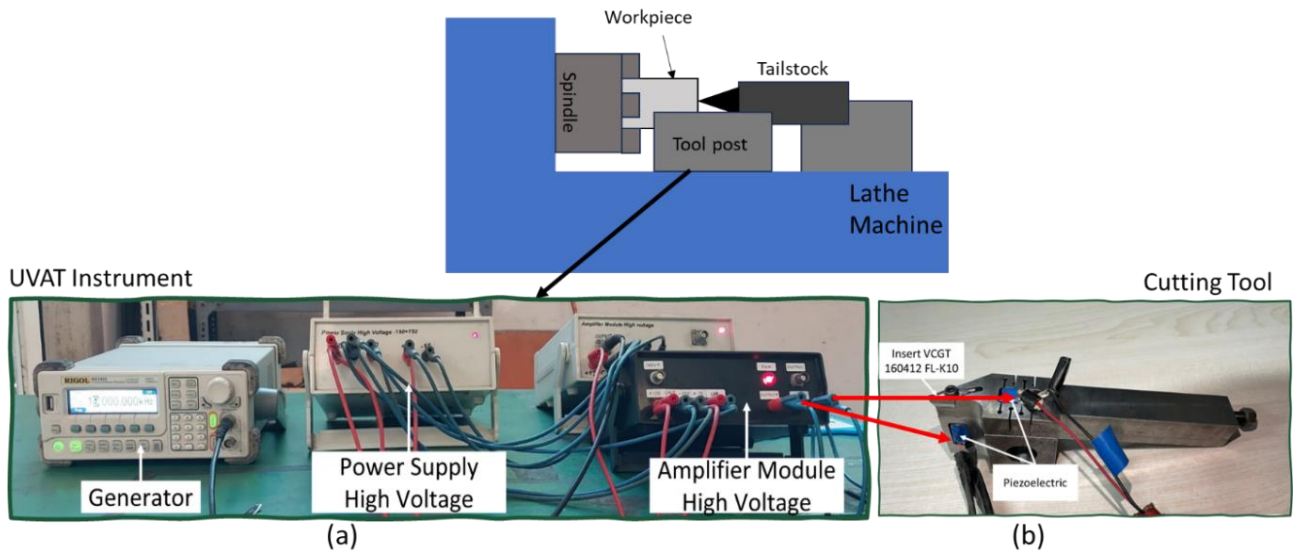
UVAT cutting set-up, using a specific toolholder connected directly to the UVAT device (RNO vibrator). The tailstock is used to ensure stable rotating of the workpiece
